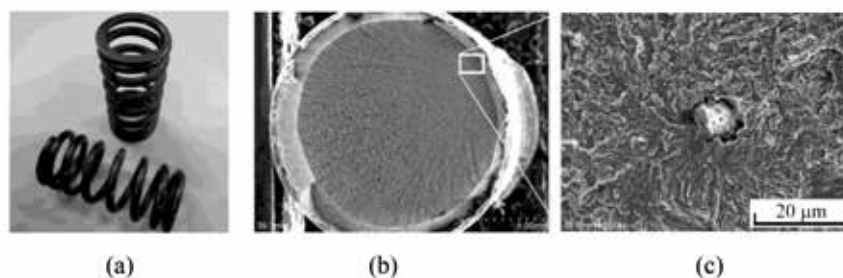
(a) Valve spring (b) Tensile fracture by hydrogen embrittlement (c) Nonmetallic inclusion at fracture origin of (b)
